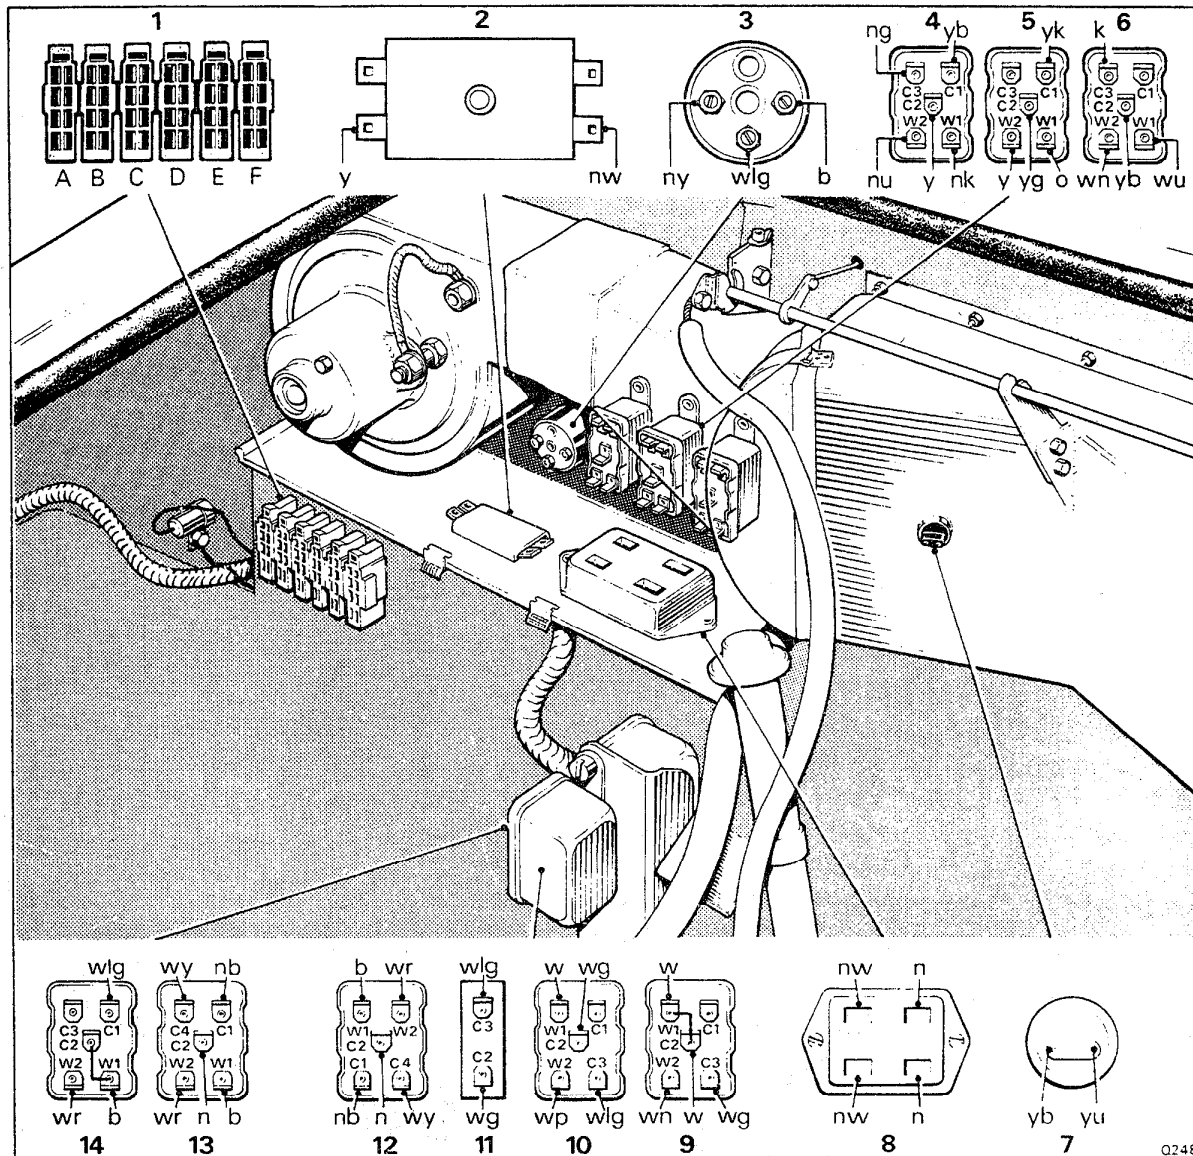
Electrical disconnection points for engine and sub-frame removal
